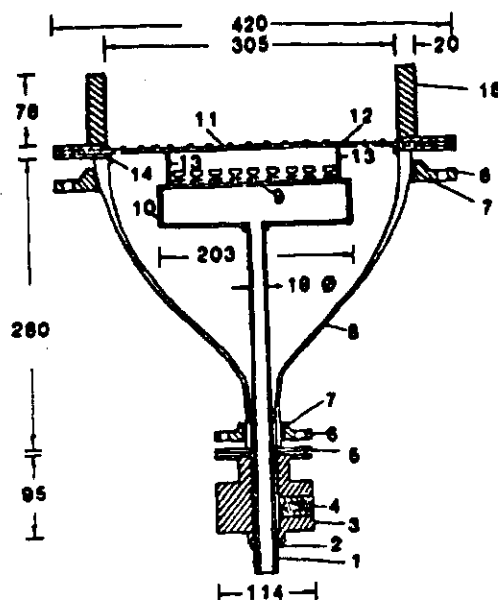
A. Design details of the bottom end assembly of the 0.305 m diameter slurry bubble column. (1) gas inlet pipe, (2) Teflon coated nut, (3) liquid drain adapter, (4) liquid drain, (5) gaskets, (6) flanges, (7) soft inserts, (8) conical glass section, (9) bubble cap distributor plate, (10) cylindrical holder, (11) perforated plate distributor, (12) stainless steel wire cloth, (13) spacer studs, (14) locating pins, and (15) metal insert. All dimensions are in mm.
